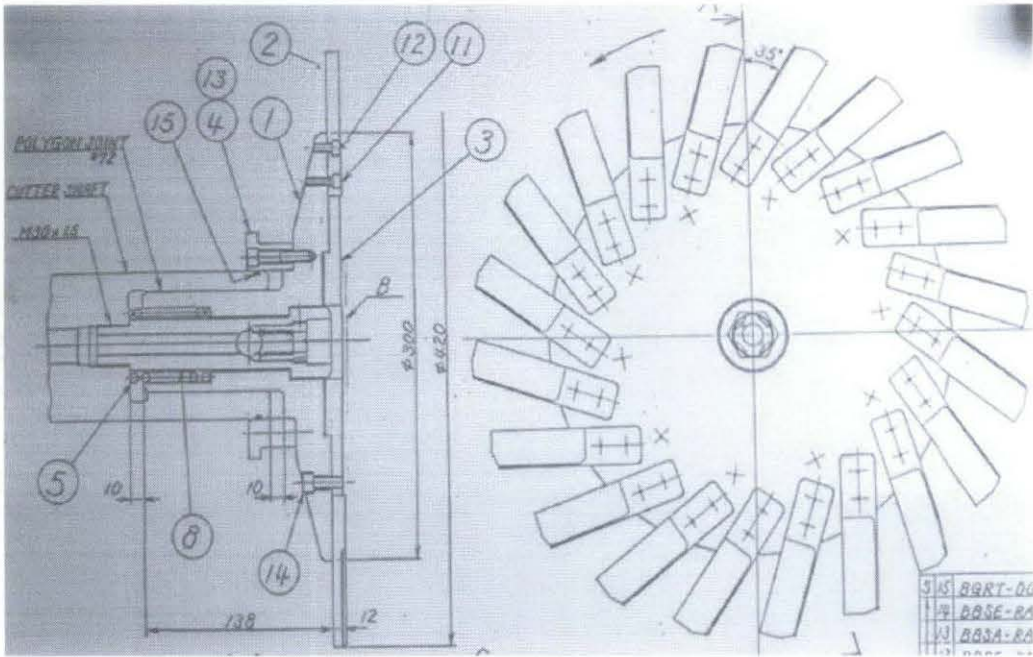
Cutter blades on pelletizer drive rotor assembly<sup>2</sup>.
